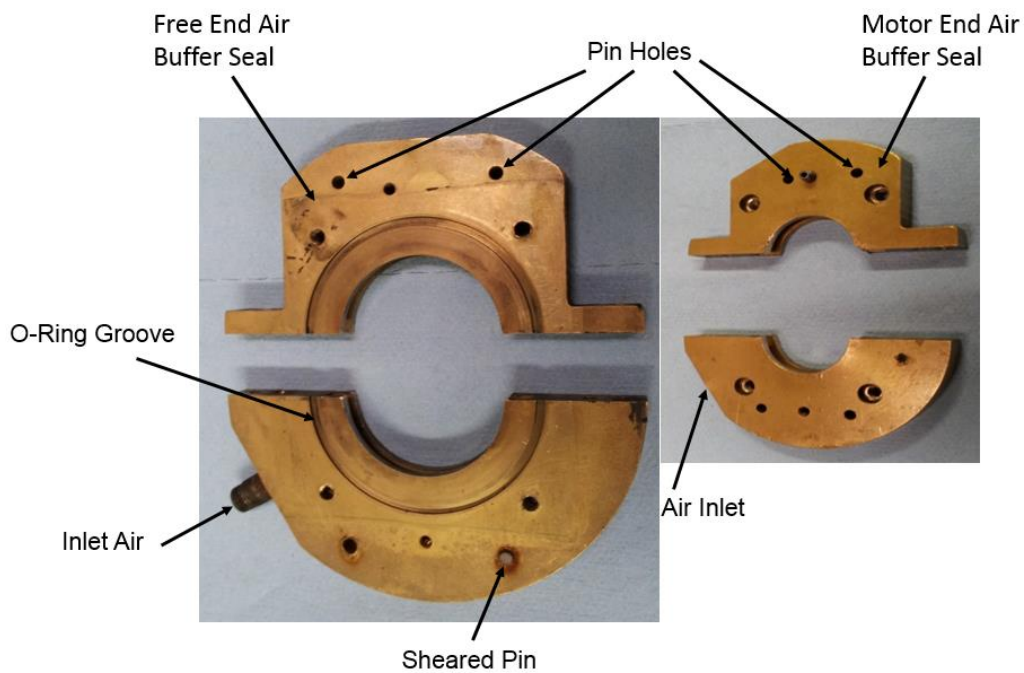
Photograph of motor side and free side air buffer seal after failure [10].
